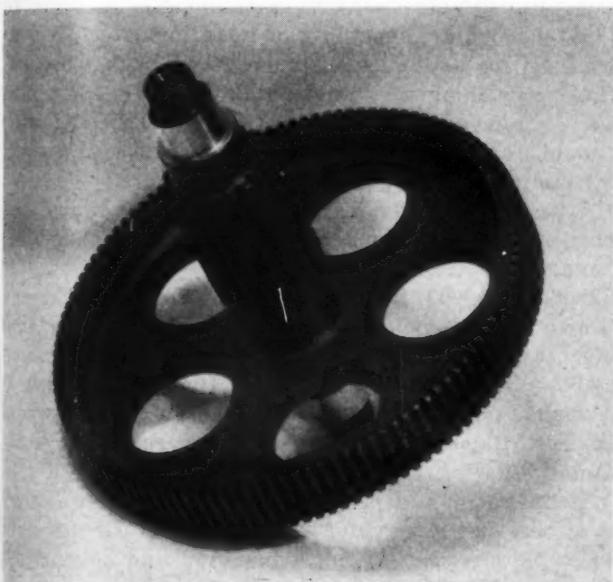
Gear machined from a medium-carbon alloy steel forging and heat treated to 48 to 50 Rockwell C
